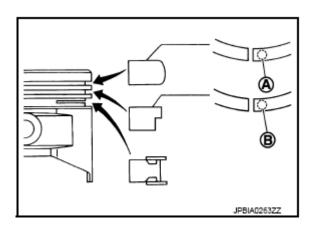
Identifying Piston Rings Installation Position Courtesy of NISSAN NORTH AMERICA, INC.
